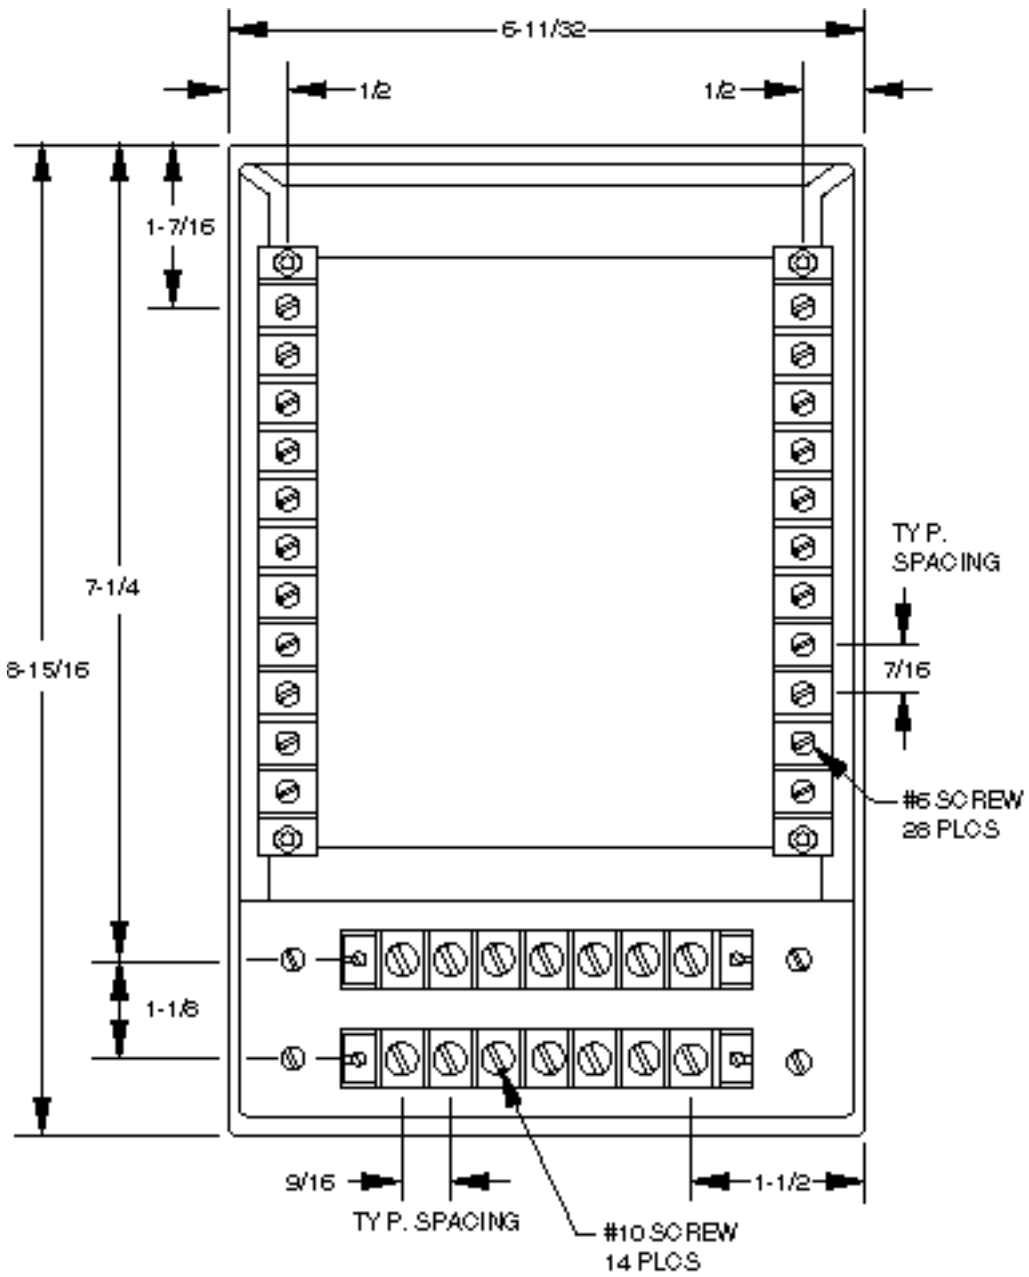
Outline & Dimensions for Panel Mounted ("P" Option) JEM 1 Meters
